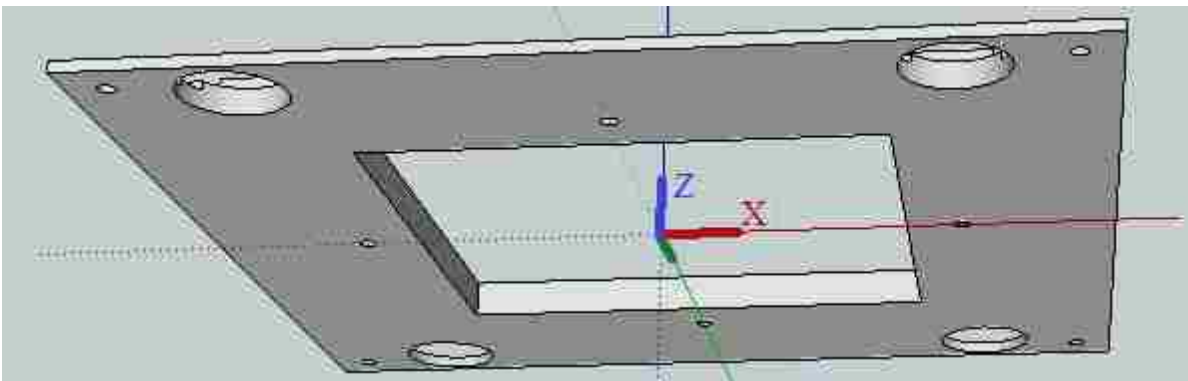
Bottom orthogonal view of the 10x10 cm² lower trimmer lead plate.
